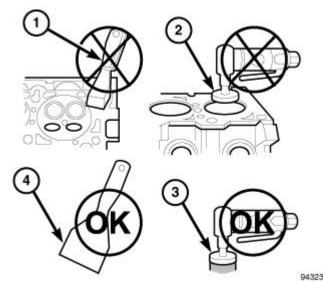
PROPER TOOL USAGE FOR SURFACE PREPARATION Courtesy of CHRYSLER LLC
